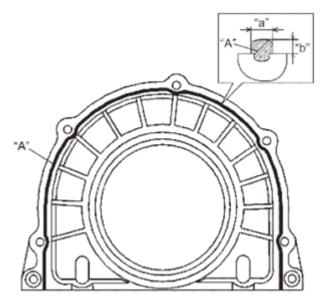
Applying Sealant To Mating Surface Of Rear Oil Seal Housing Courtesy of SUZUKI OF AMERICA CORP.
